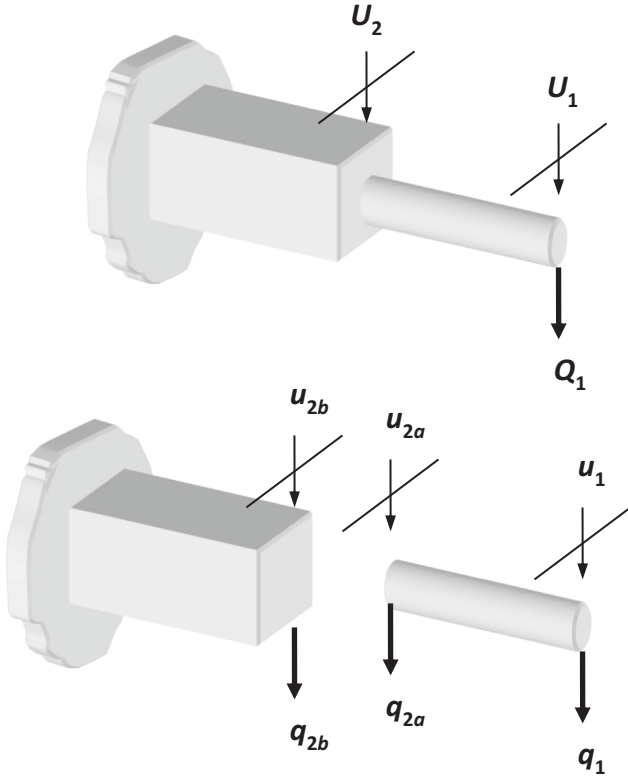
Receptance coupling model for determining G_{11} using a rigid connection. (Top) assembly. (Bottom) components.
